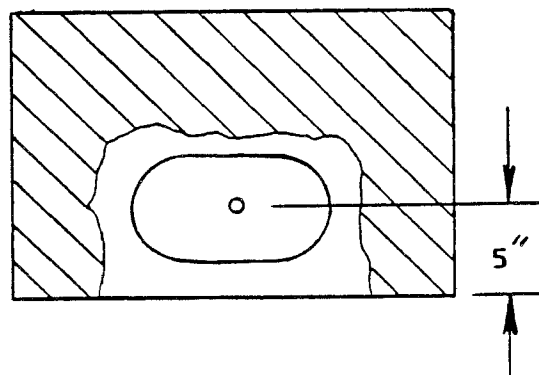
HOLE LOCATION WITHIN CARGO LINER TEST SPECIMEN
